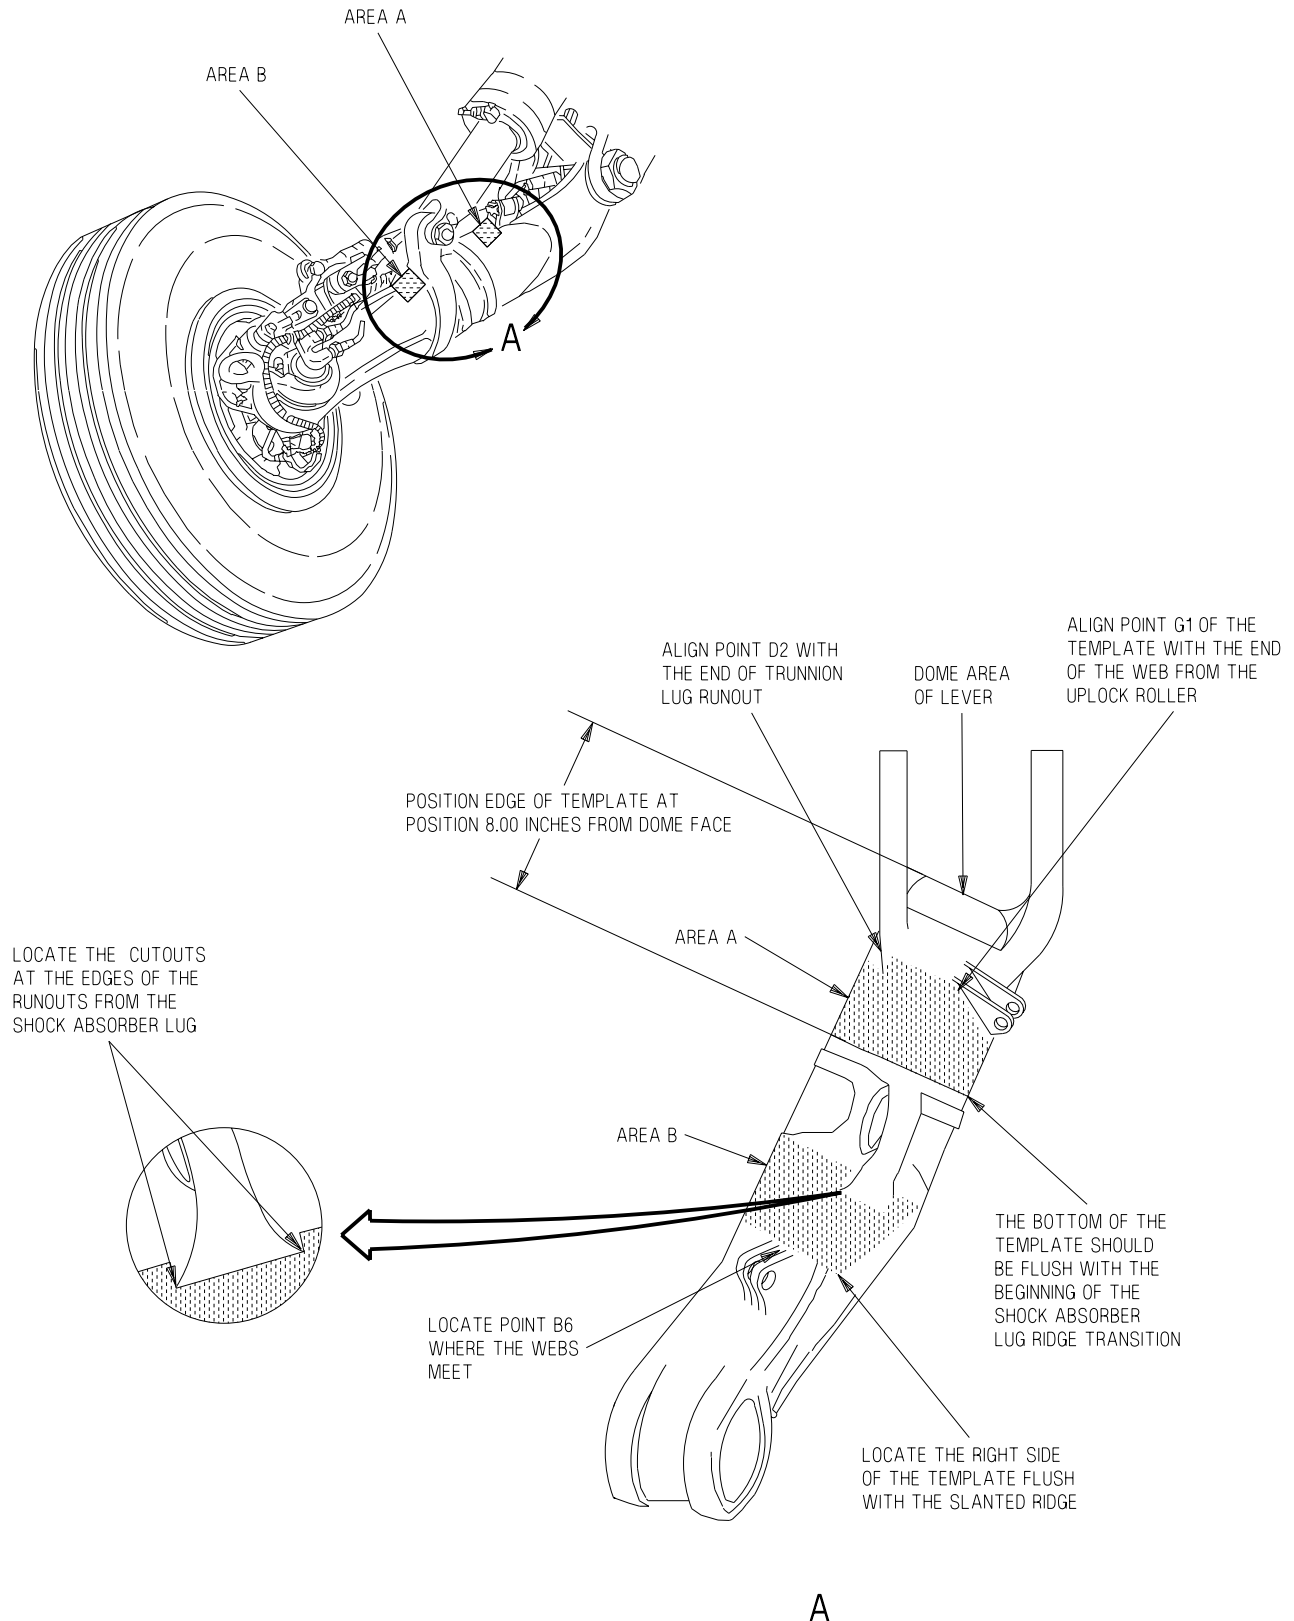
Main Landing Gear Lever Assembly Templates (Sheet 1)
